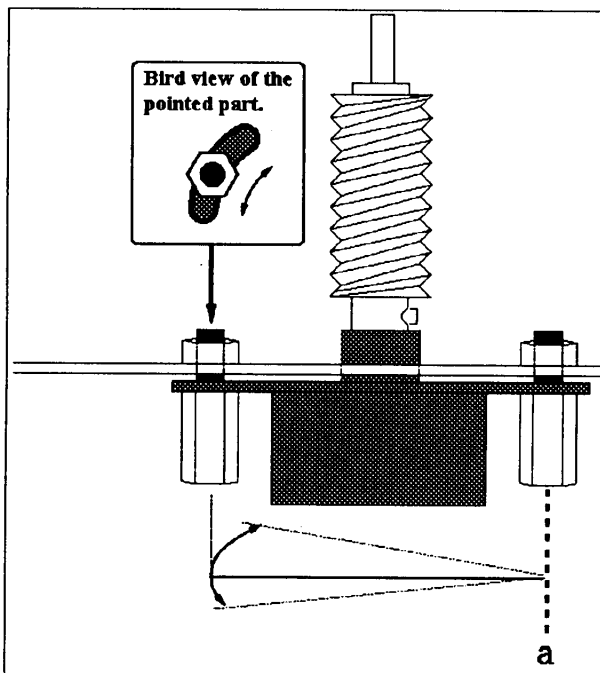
The adjustment of motor assembly for the connection between the worm and the worm wheel.
